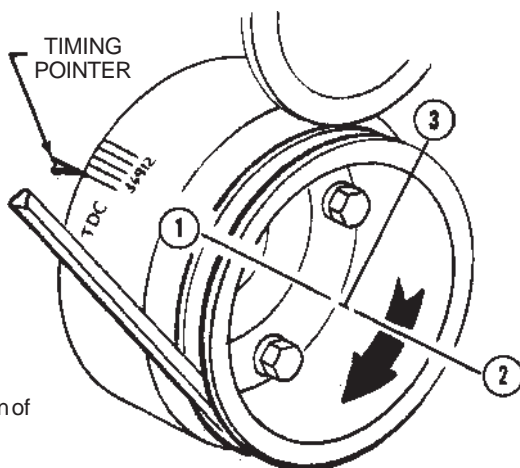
Position of Crankshaft for Checking and Adjusting Valve Clearance
